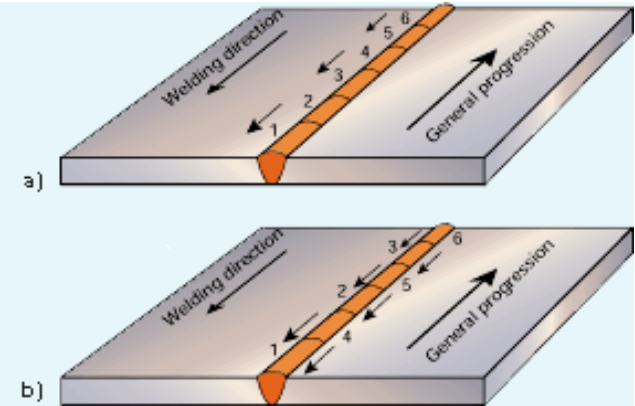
Welding direction in order to control distortion a) back step welding b) skip welding [12]
